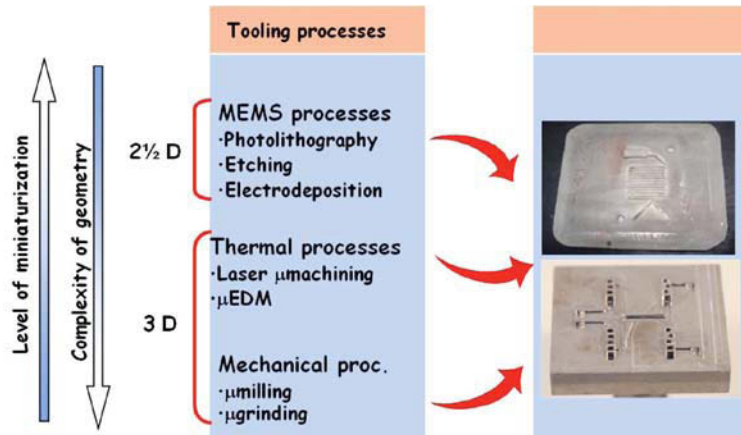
Example of mold-making technologies in micro-manufacturing.
